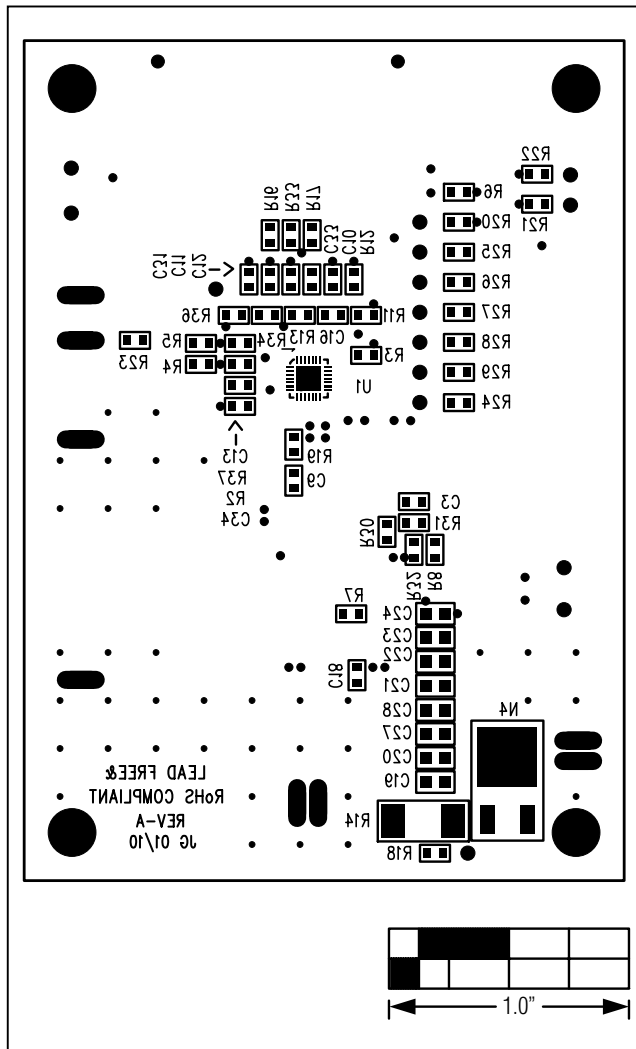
MAX17409 EV Kit Component Placement Guide—Solder Side
